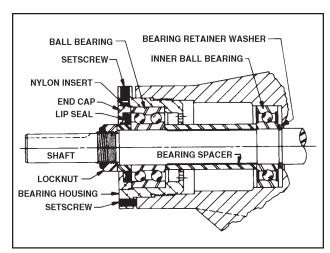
Thrust-Bearing assembly (AS, AK, AL)
